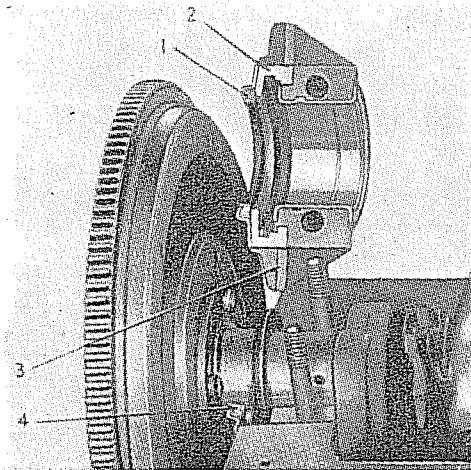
Crankshaft Rear Bearing Cap Oil Seals, (Assembled view).
